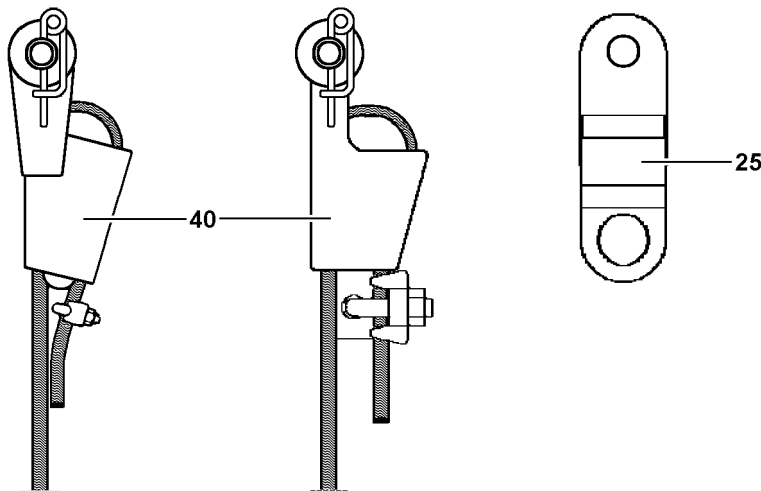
Wedge locks installed on the rope (rope without locking clamp / locking cast sleeve), adapter\* separate
